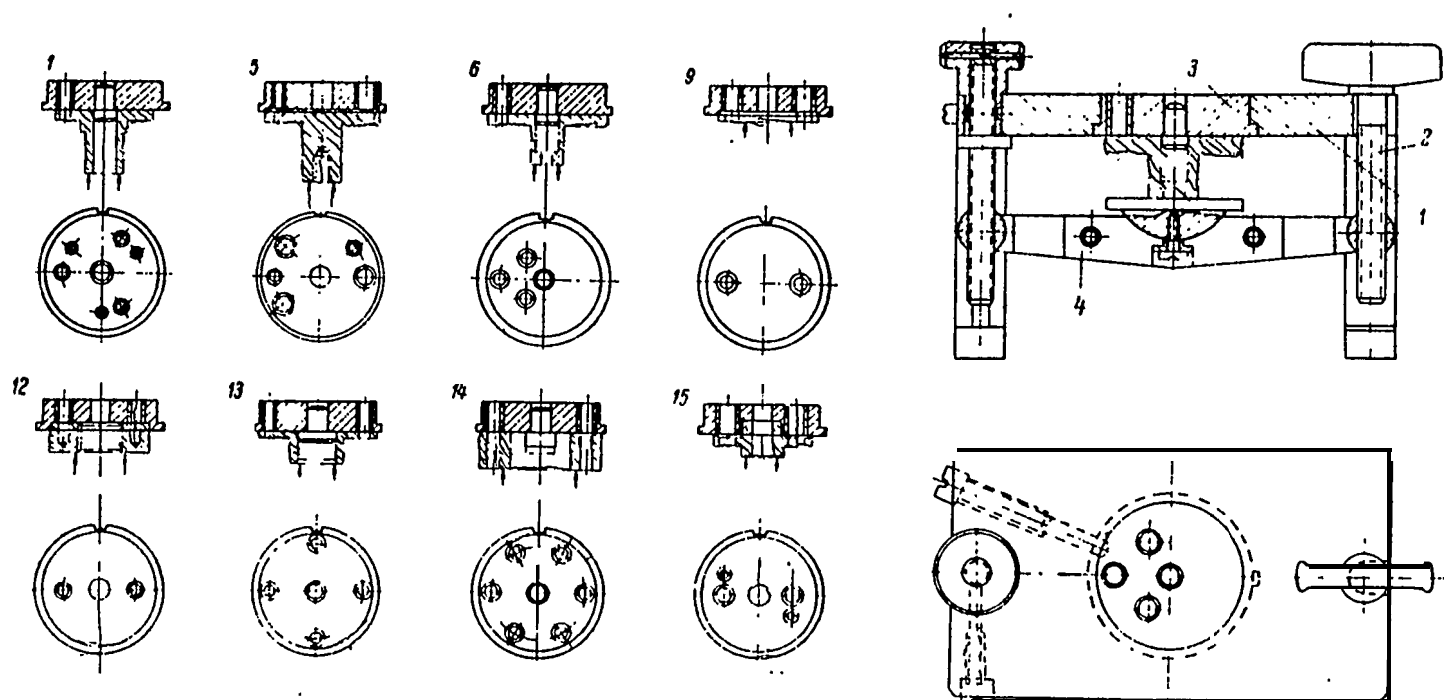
, Example of a group drill jig and adapters used for drilling 8 different parts in a part family
